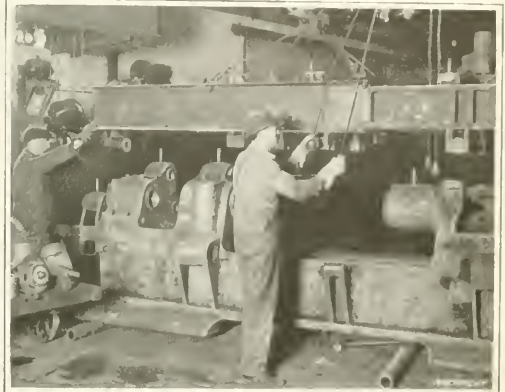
Lowering Assembling Jig into Place on Casting. Note Bearings on Under Side of Jig for bringing Lathe Bearings and Ways into Alignment
